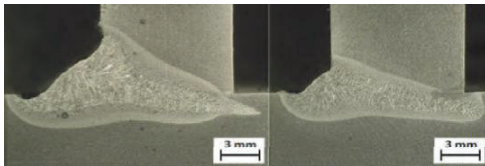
HLAW weld (left): arc leading configuration, laser power 9.5 kW, welding speed 0.75 m/min, filler wire feed rate 9.5 m/min; Laser weld (right): laser power 9.5 kW, welding speed 1 m/min.
